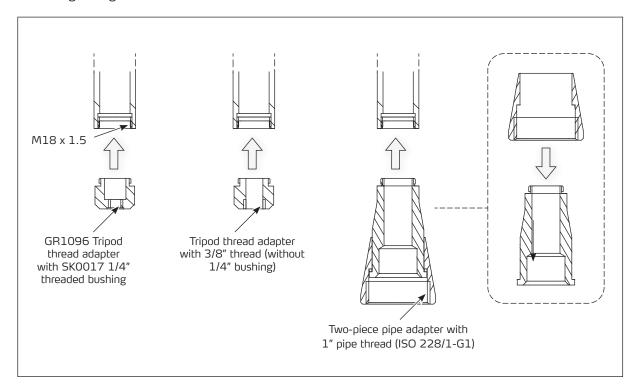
The 41AC-3 lower housing's thread and adaptor for tripod or pole mount.
